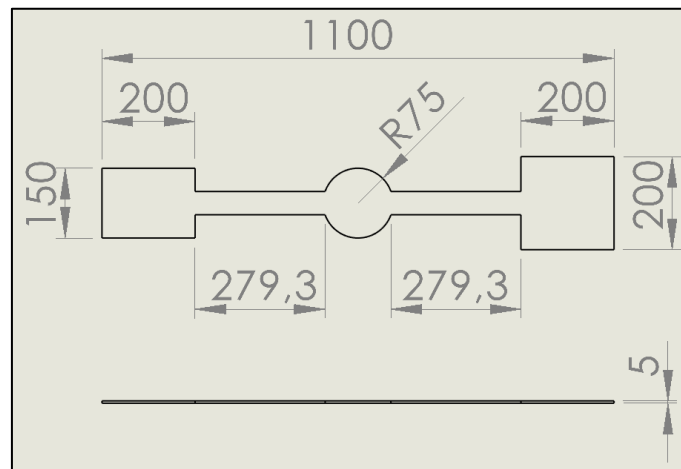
20: Technical drawing of the ground platform for positioning the reef creation objects (cube, cylinder, and rectangular prism) (in millimeters)
